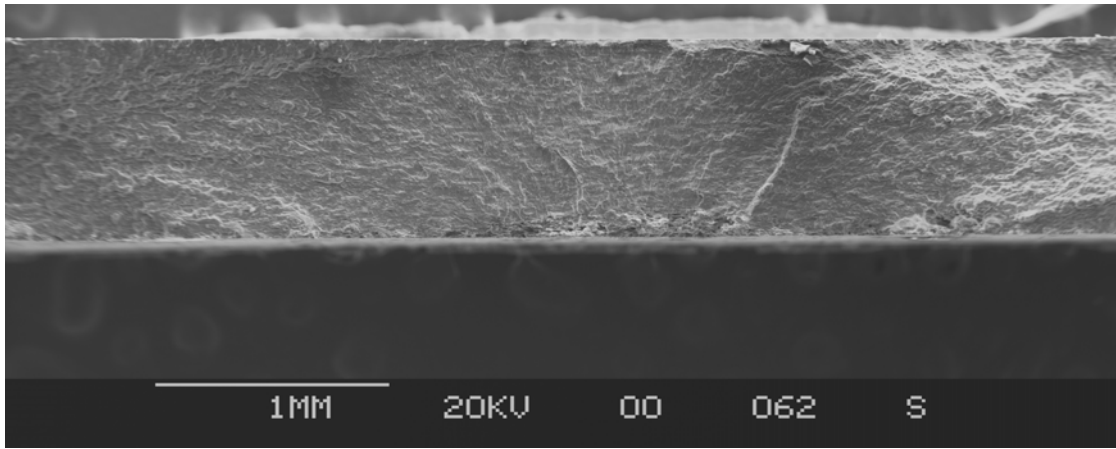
Fatigue Crack on Fracture Surface of Specimen 6002 Showing Multiple Origins.
